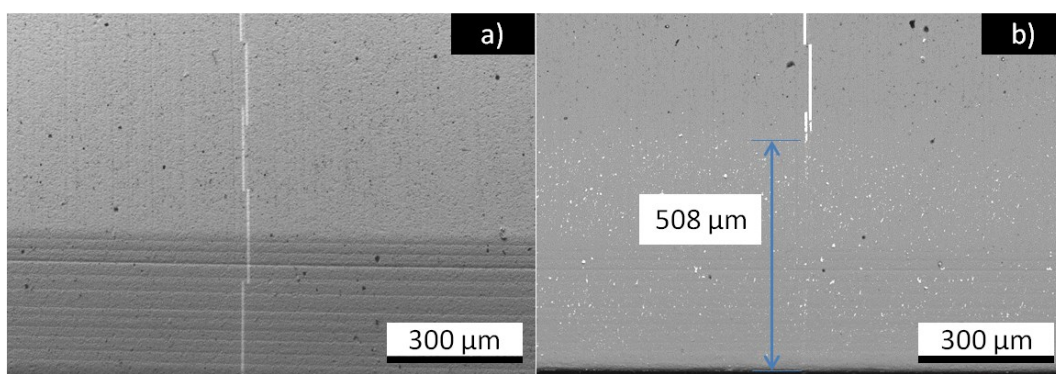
SEM micrographs of rake face of a) a virgin insert, and b) of the same insert after two cuts tested under test setup A conditions, corresponding an aTWCL of about 0.103 m. The brighter lines are platinum layers, deposited on insert's rake face. After two cuts these layers are partially removed due to chip forming.
